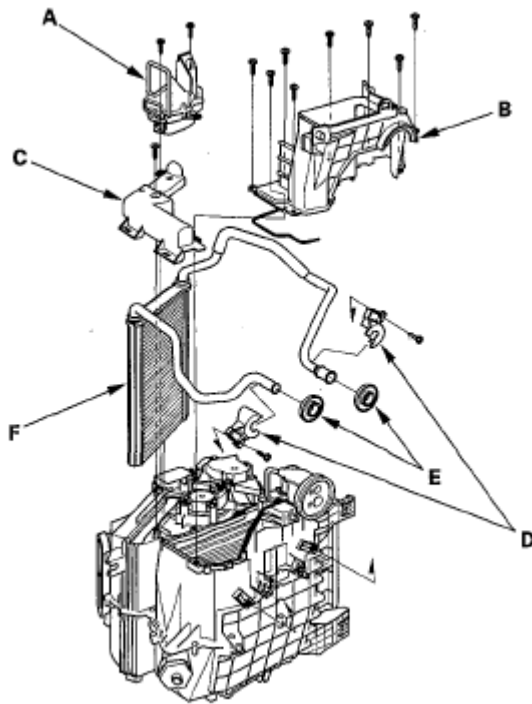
Identifying Passenger's Heater Duct, Expansion Valve Cover, Front Heater Core Cover And Grommets
